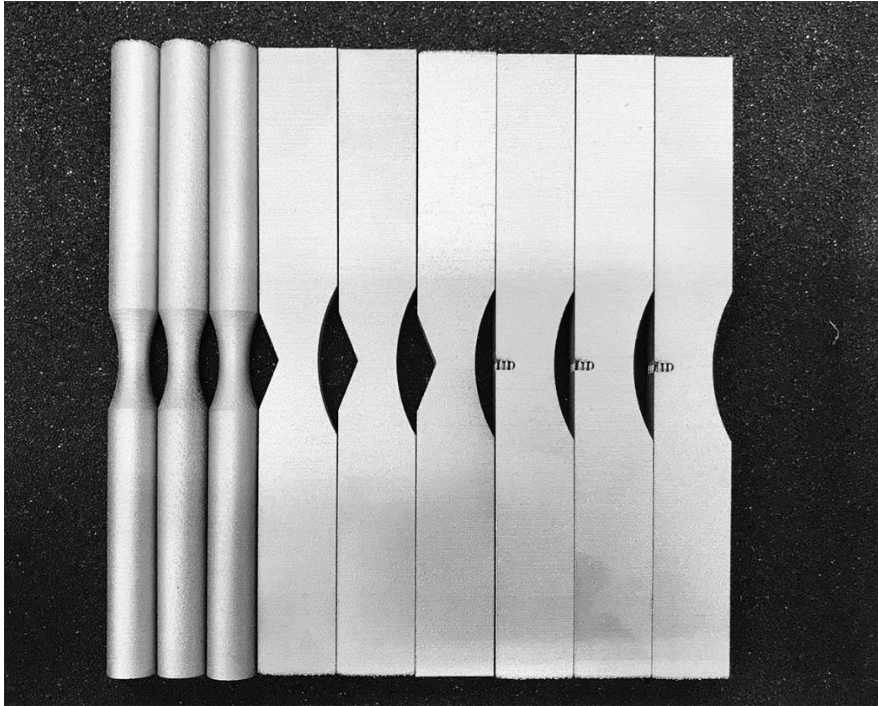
Specimen for tensile and bending testing fabricated by SLM [Braun et al., 2020]
